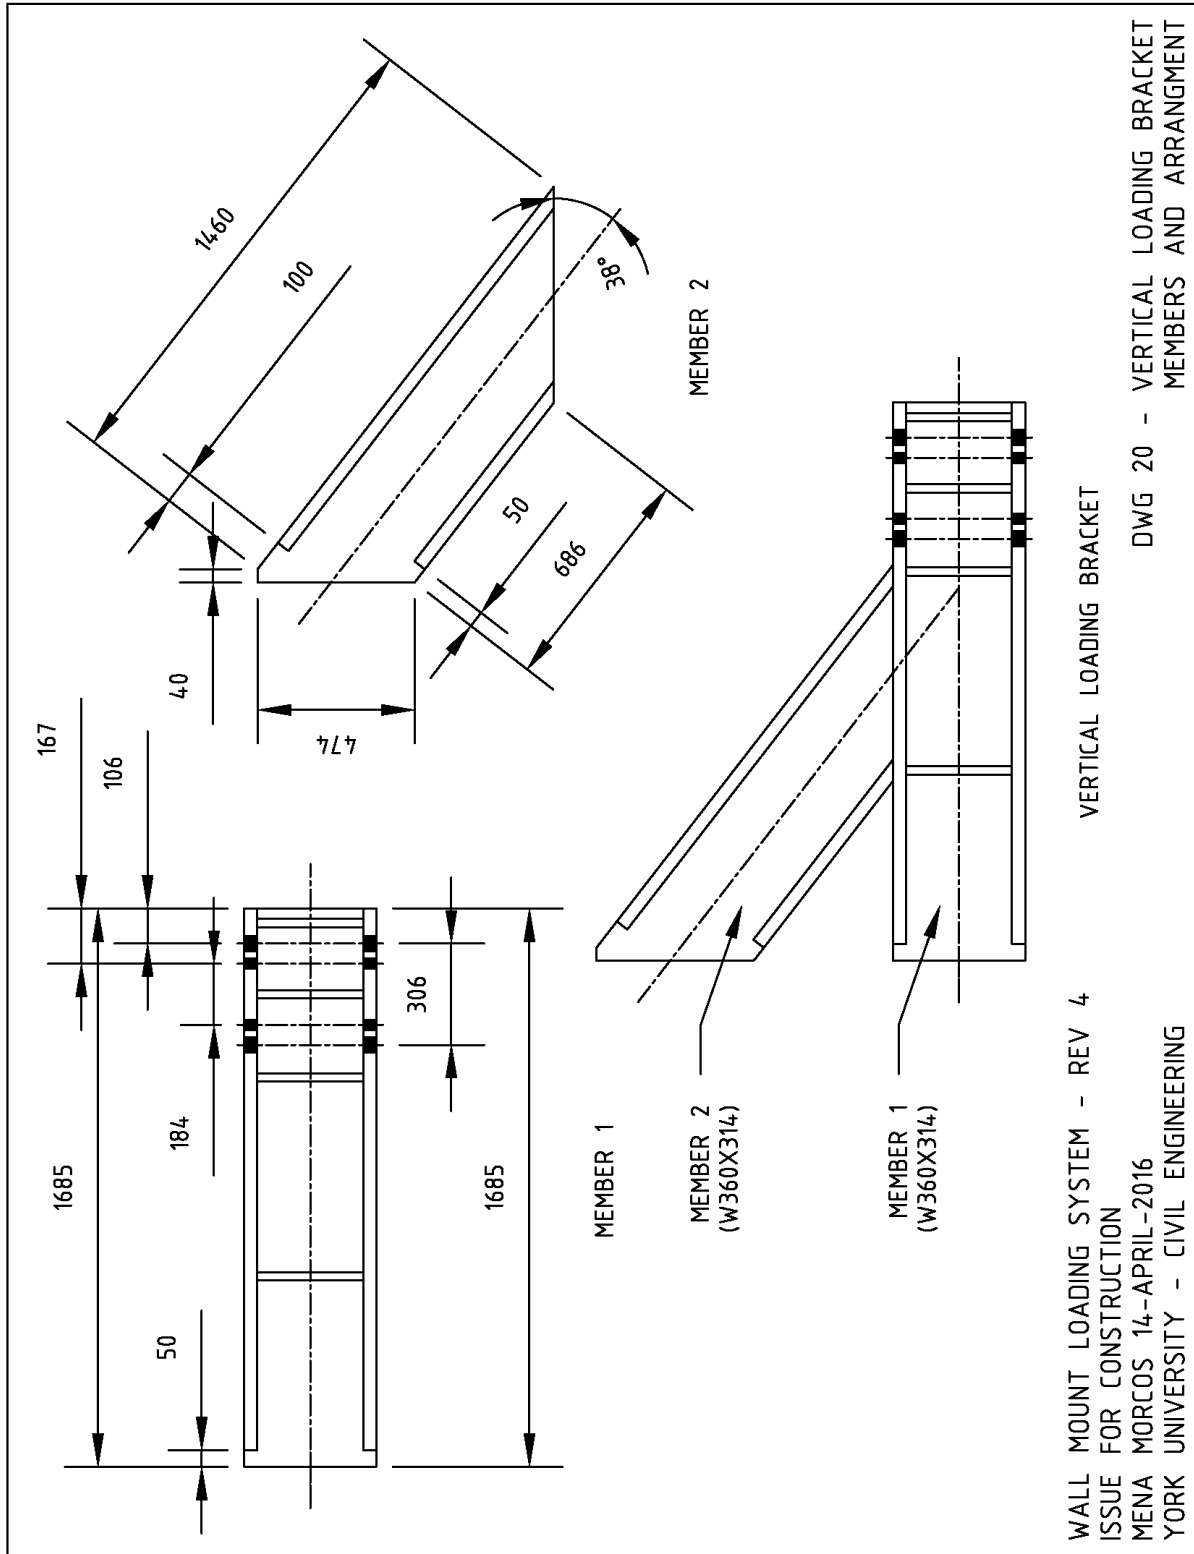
Wall mount loading system design and fabrication drawing – Drawing 20.
